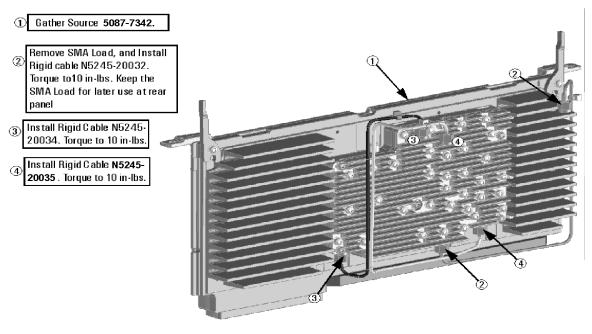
A10 Source 2 Assembly Bracket Installation (5087-7342, N5247-20136, 0515-0375, 0515-2078, 0515-0666)
